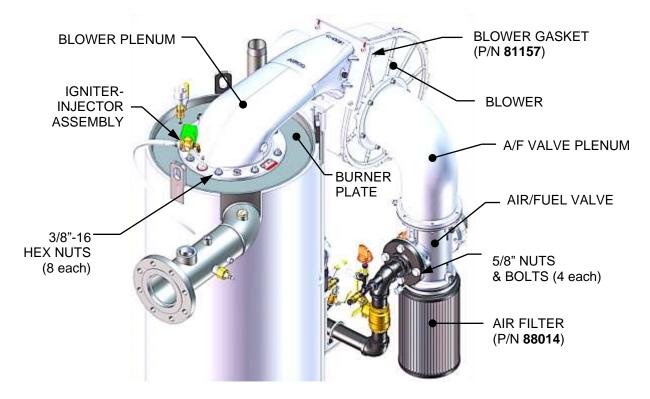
Burner Assembly Mounting Details – BMK2500 – 5000N
